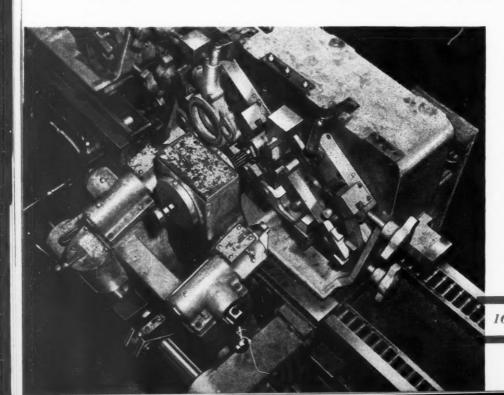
Special fixture for accurately locating and rigidly clamping two of the complexshaped water-pump bodies shown in Fig. 1
